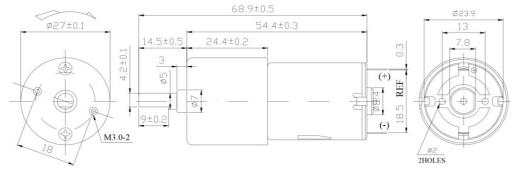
Diagram of gear-head motor including dimensions in 'mm']
